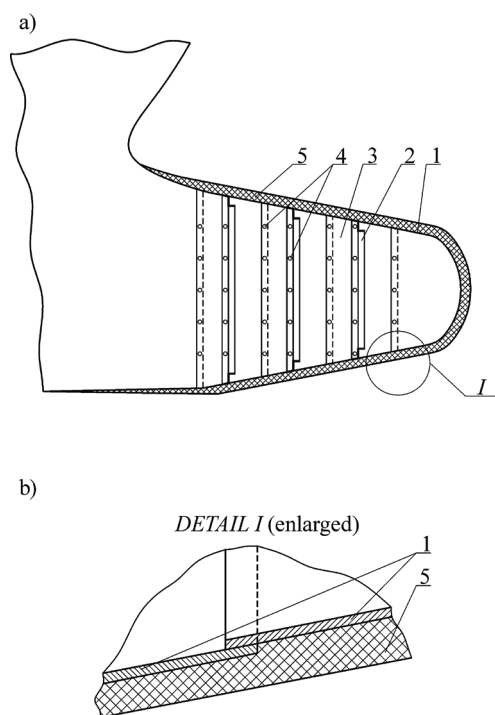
Bulb with increased longitudinal compliance from individual sections: a) general view; b) detail I; 1-shell plate; 2-circular transverse frame; 3- section of the bulb; 4- connecting element; 5- elastic shell
